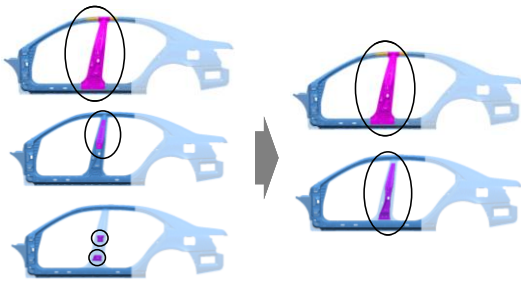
New design concept of hot-stamping center-pillar Assembly
